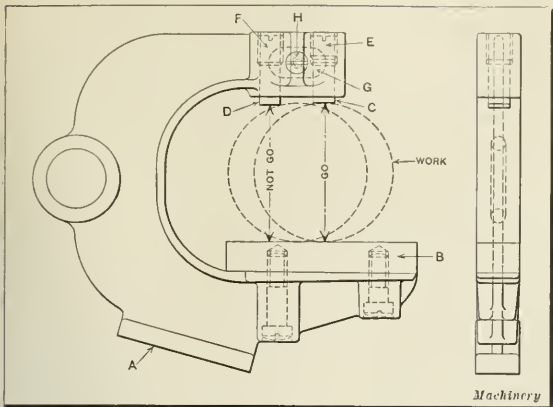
Wells Bros. Co.'s Rapid Inspection Limit Snap Gage
